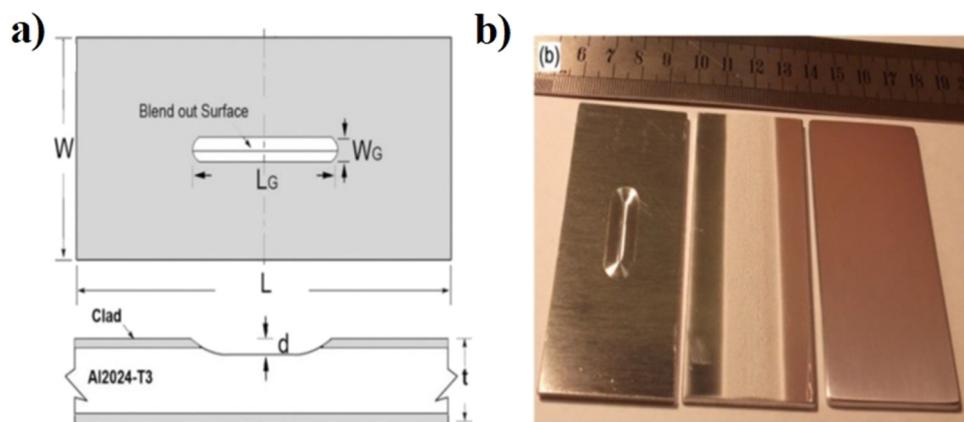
Restoration of Al cladding layer on Al alloy panel with self-machining damages by CSAM: (a) schematic representation of self-machined damage and (b) restoration technique [79].
